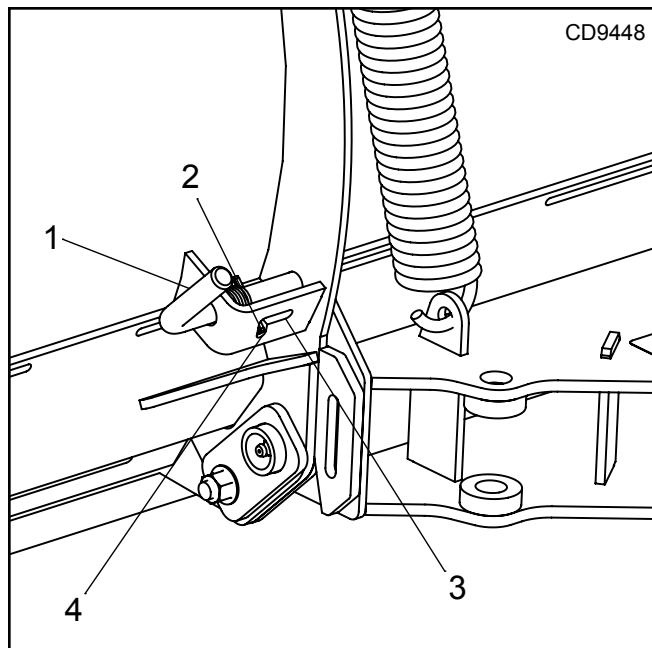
Loader Front Blade Moldboard Lock Pin Shown in Unlocked Position
